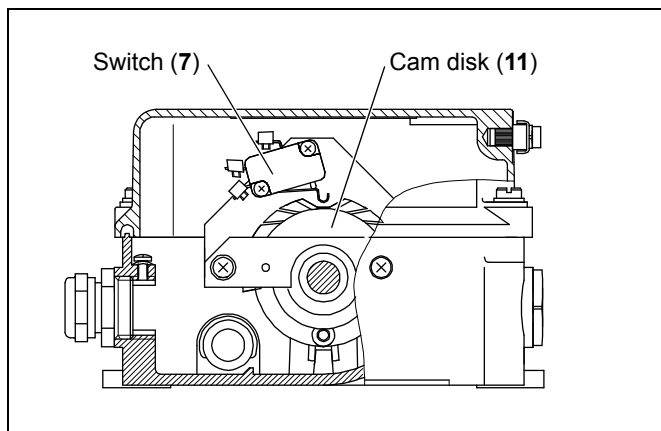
Belt misalignment switch – illustration with roller lever removed
